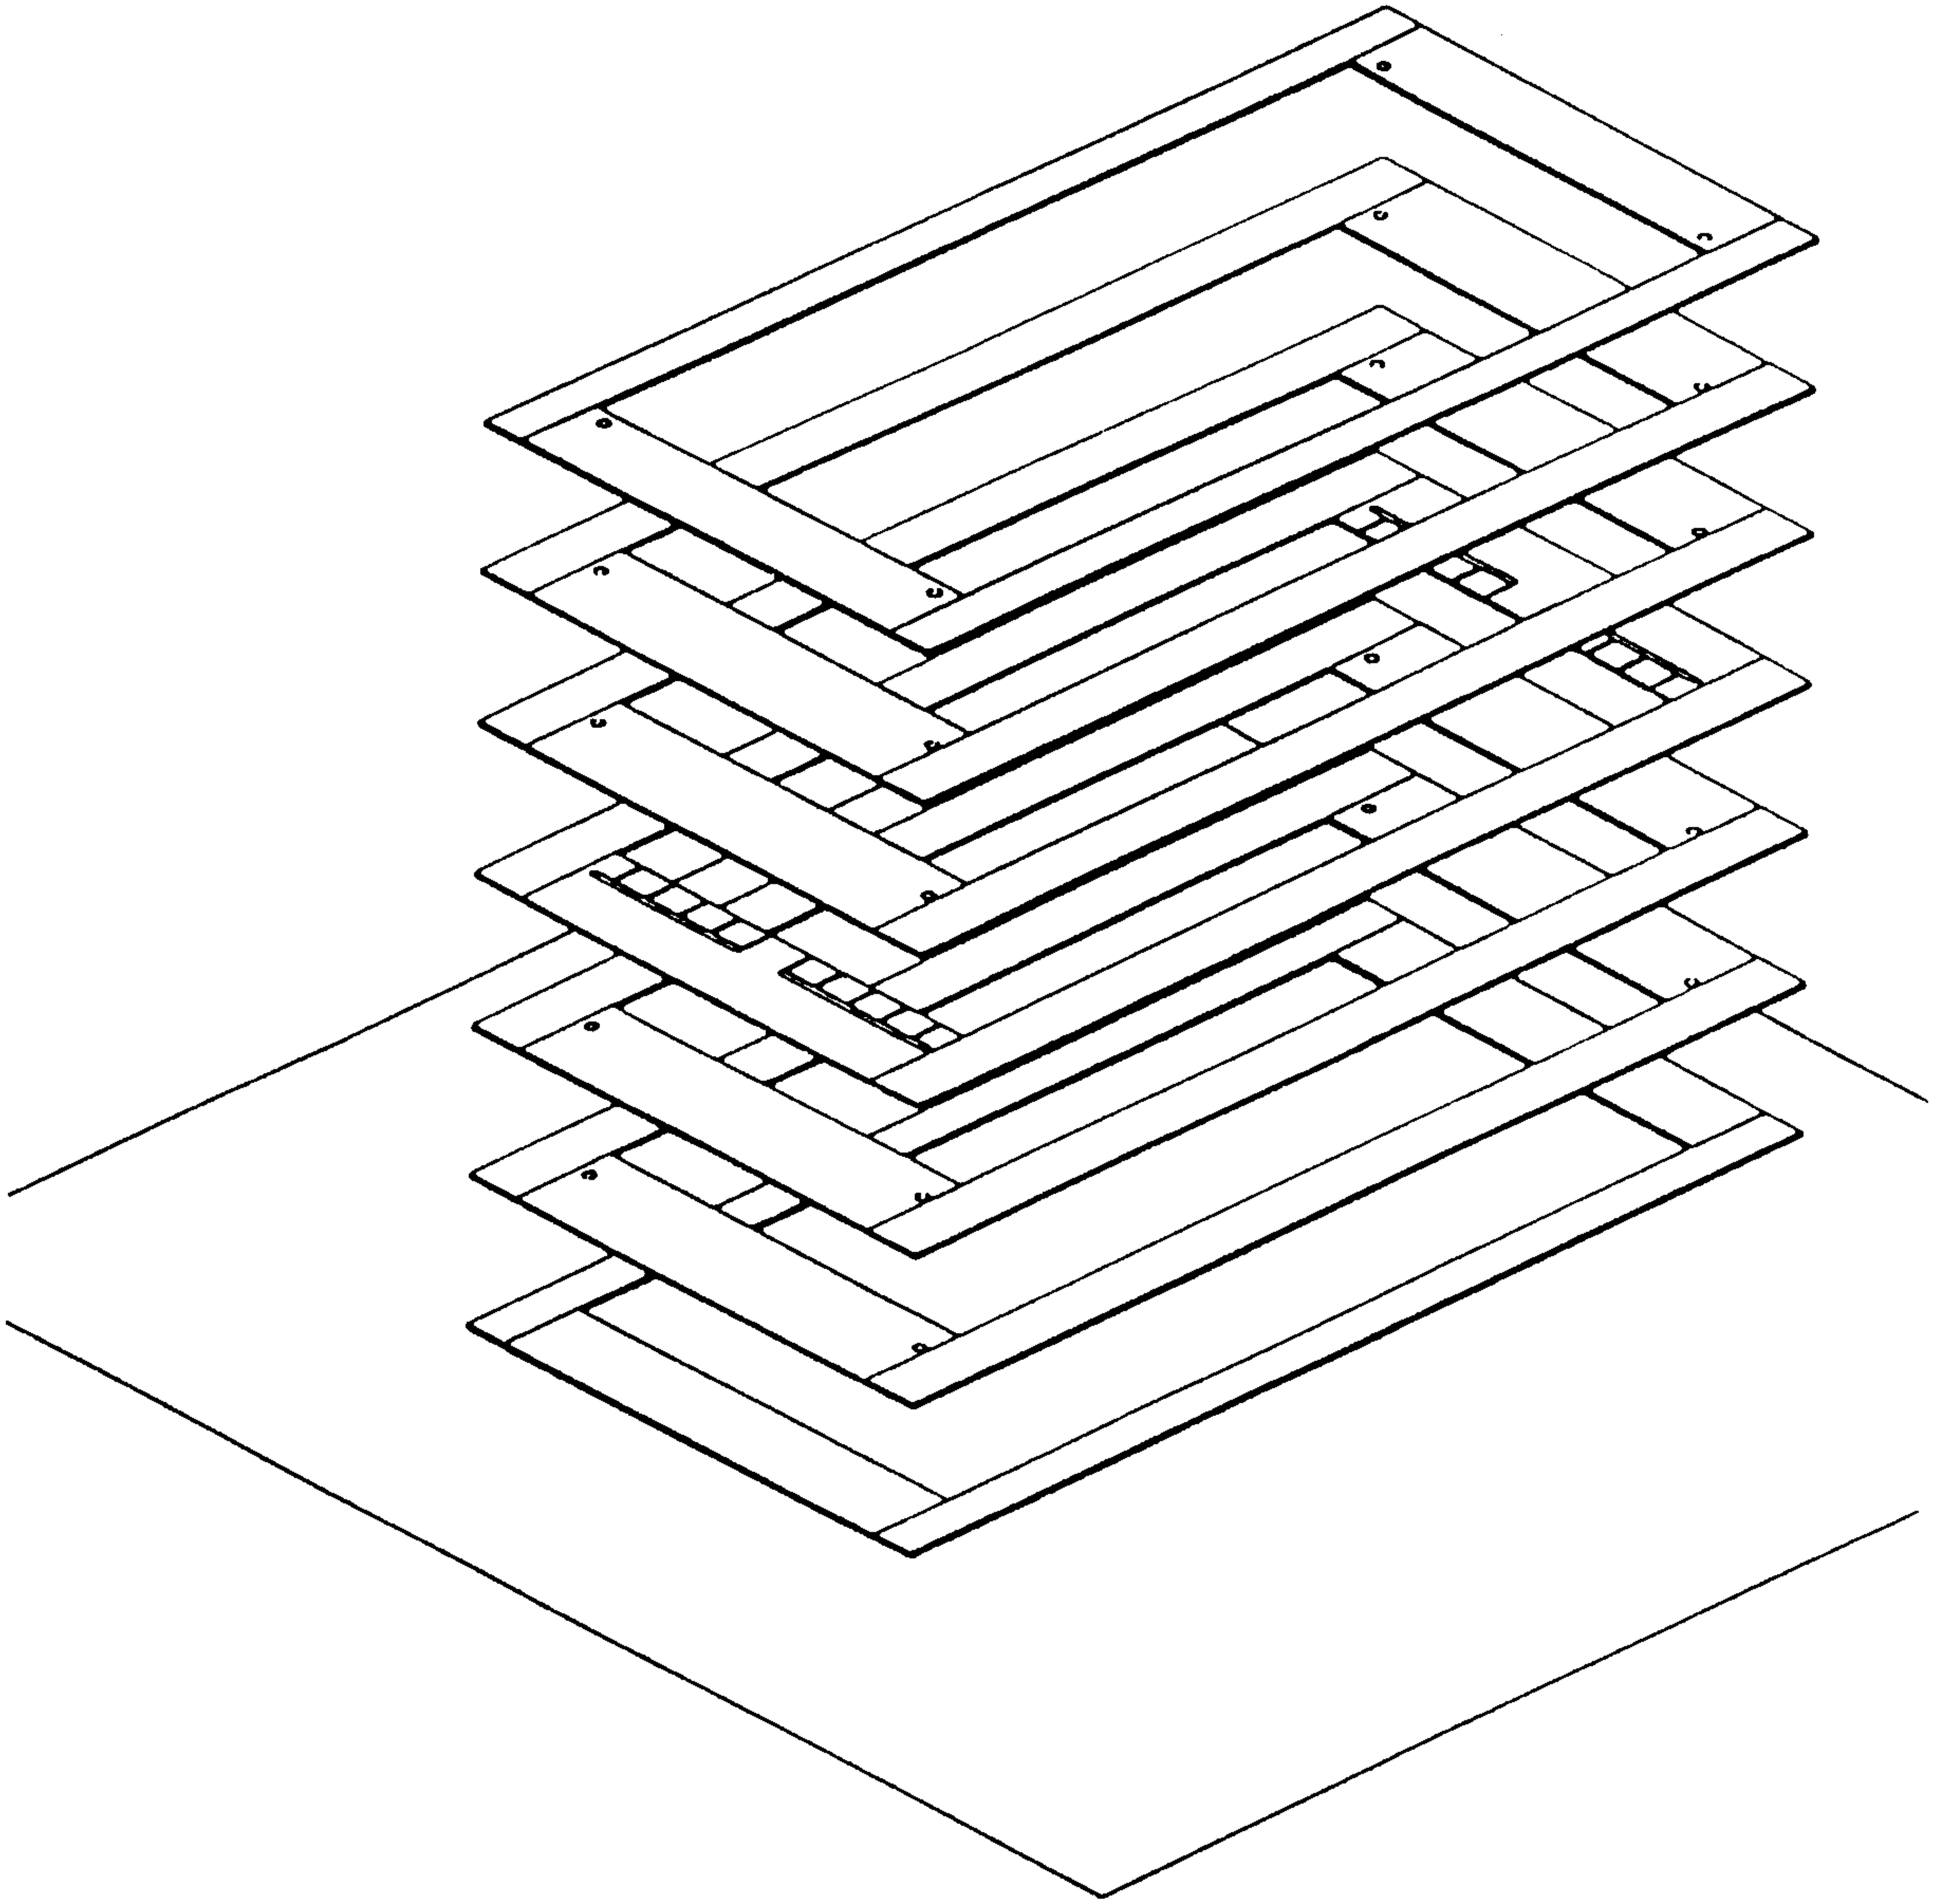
Exploded view of the drift chamber frames and gas grooves.
